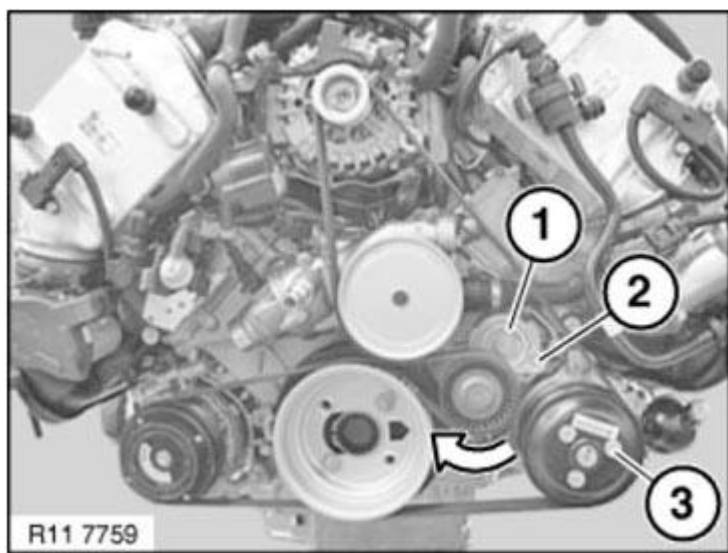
Identifying Belt Tensioner Tensioning Direction
